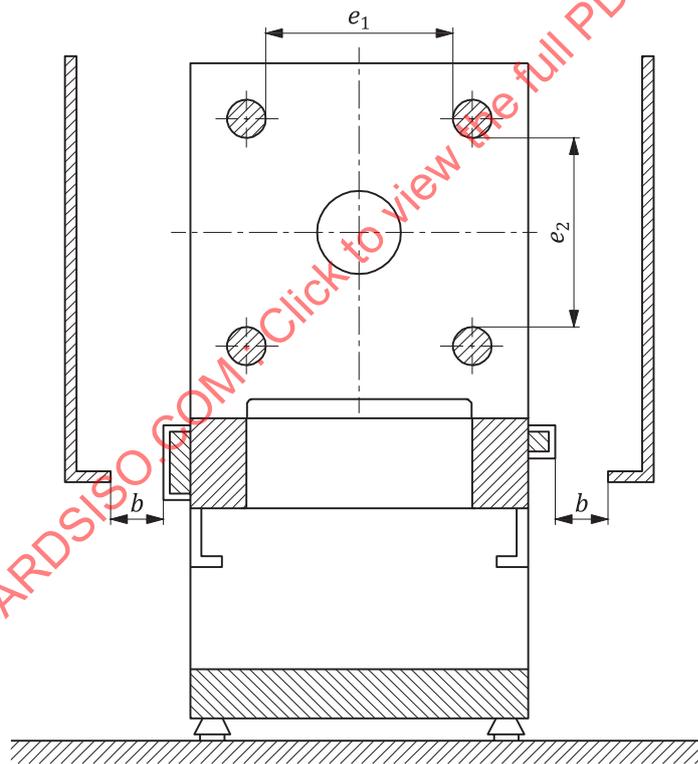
Examples of the positioning of movable guards and dimensions b , e_1 , e_2 for machines with horizontal clamping unit with tie-bars
